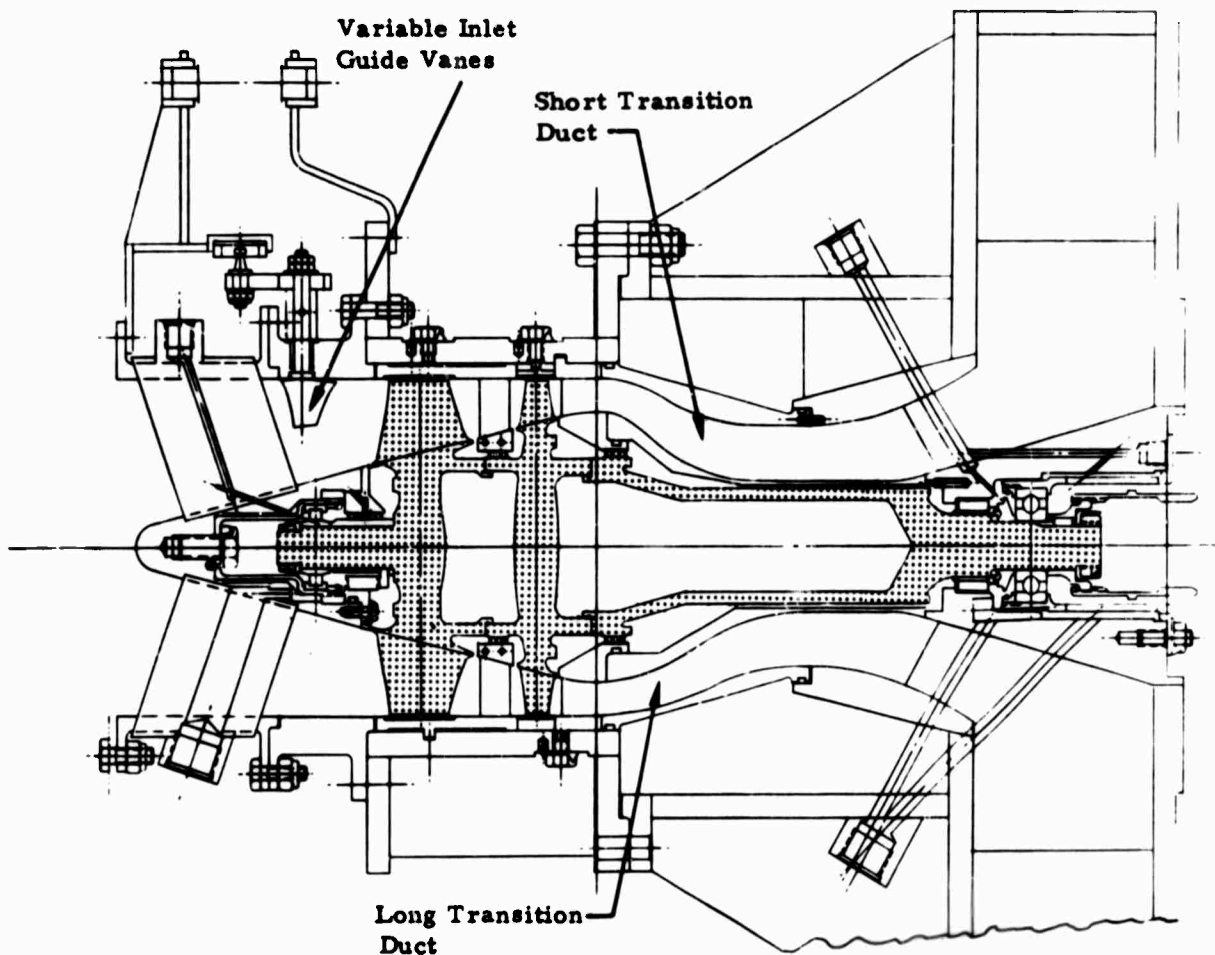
Advanced Axial Compressor Test Rig Design Layout.
